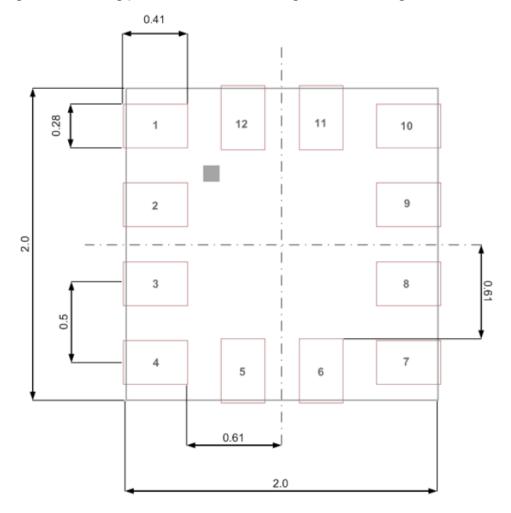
SMA130 footprint. All dimensions are given in mm.
